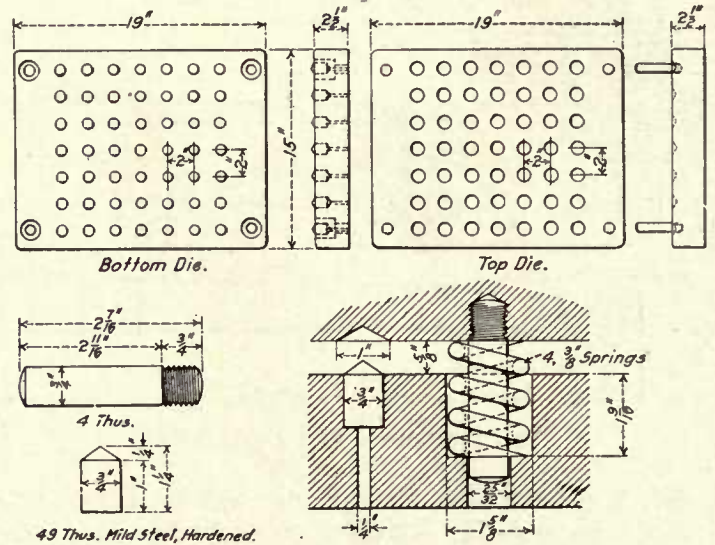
Dies for Stamping Steel Running Boards and Steps.
